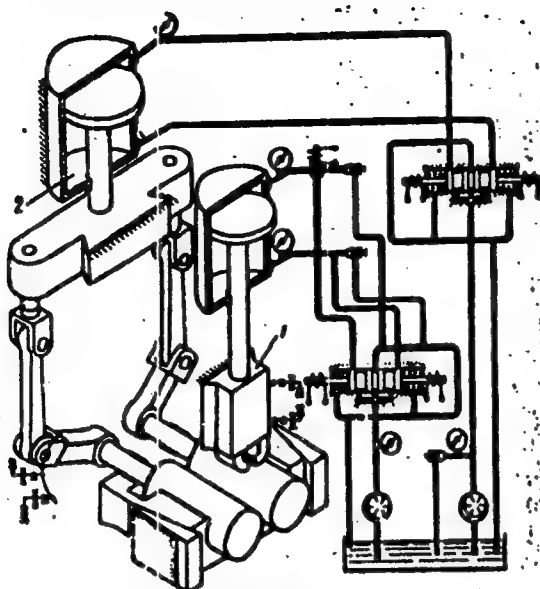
Kinematic diagram of cold-rolling mill for turbine blades
